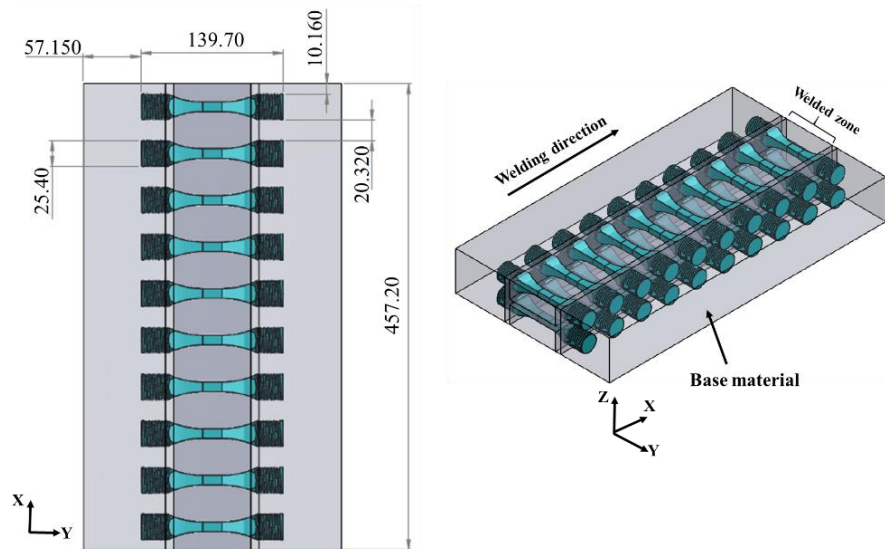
Schematic view of the fatigue samples extracted from a unique welded block (all dimensions are in mm).
